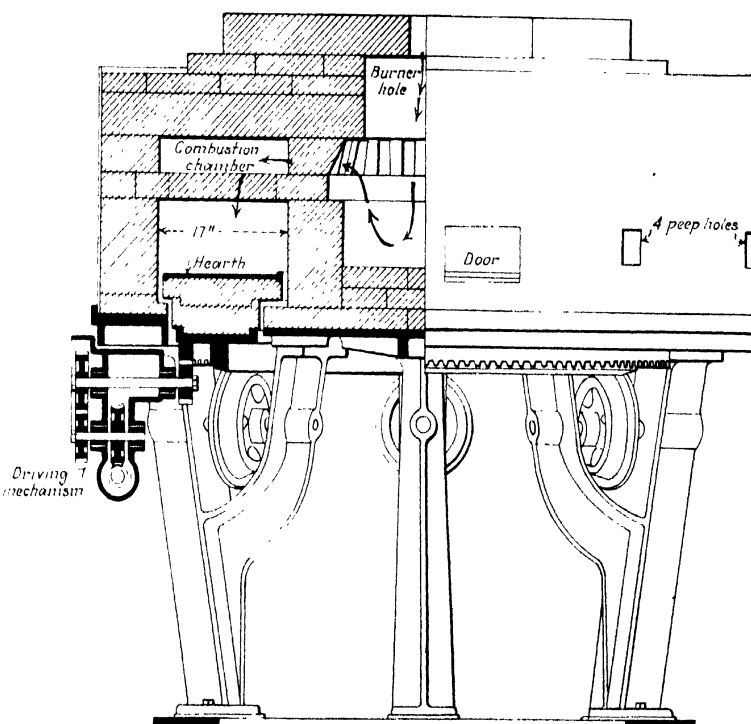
SECTIONAL ELEVATION OF ROTARY HEARTH FURNACE
